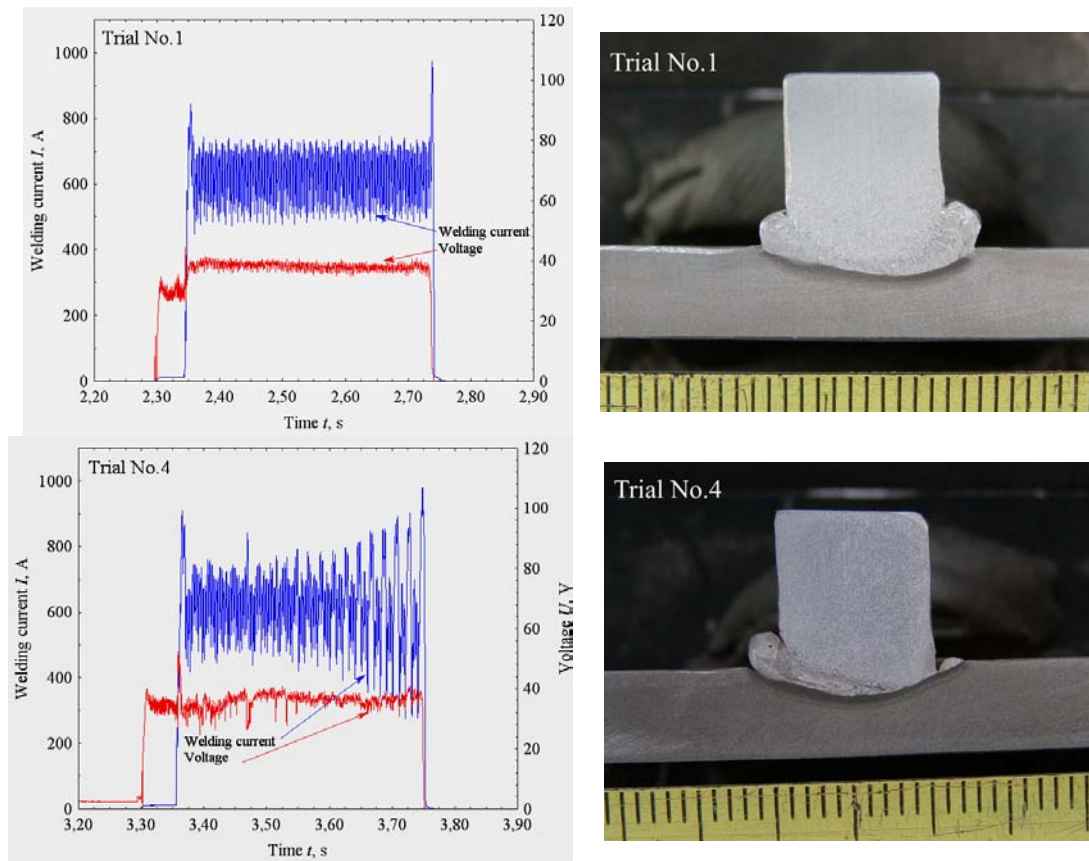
Welding current and voltage distribution during a complete stud welding process cycle and the macro section of related weld joints
